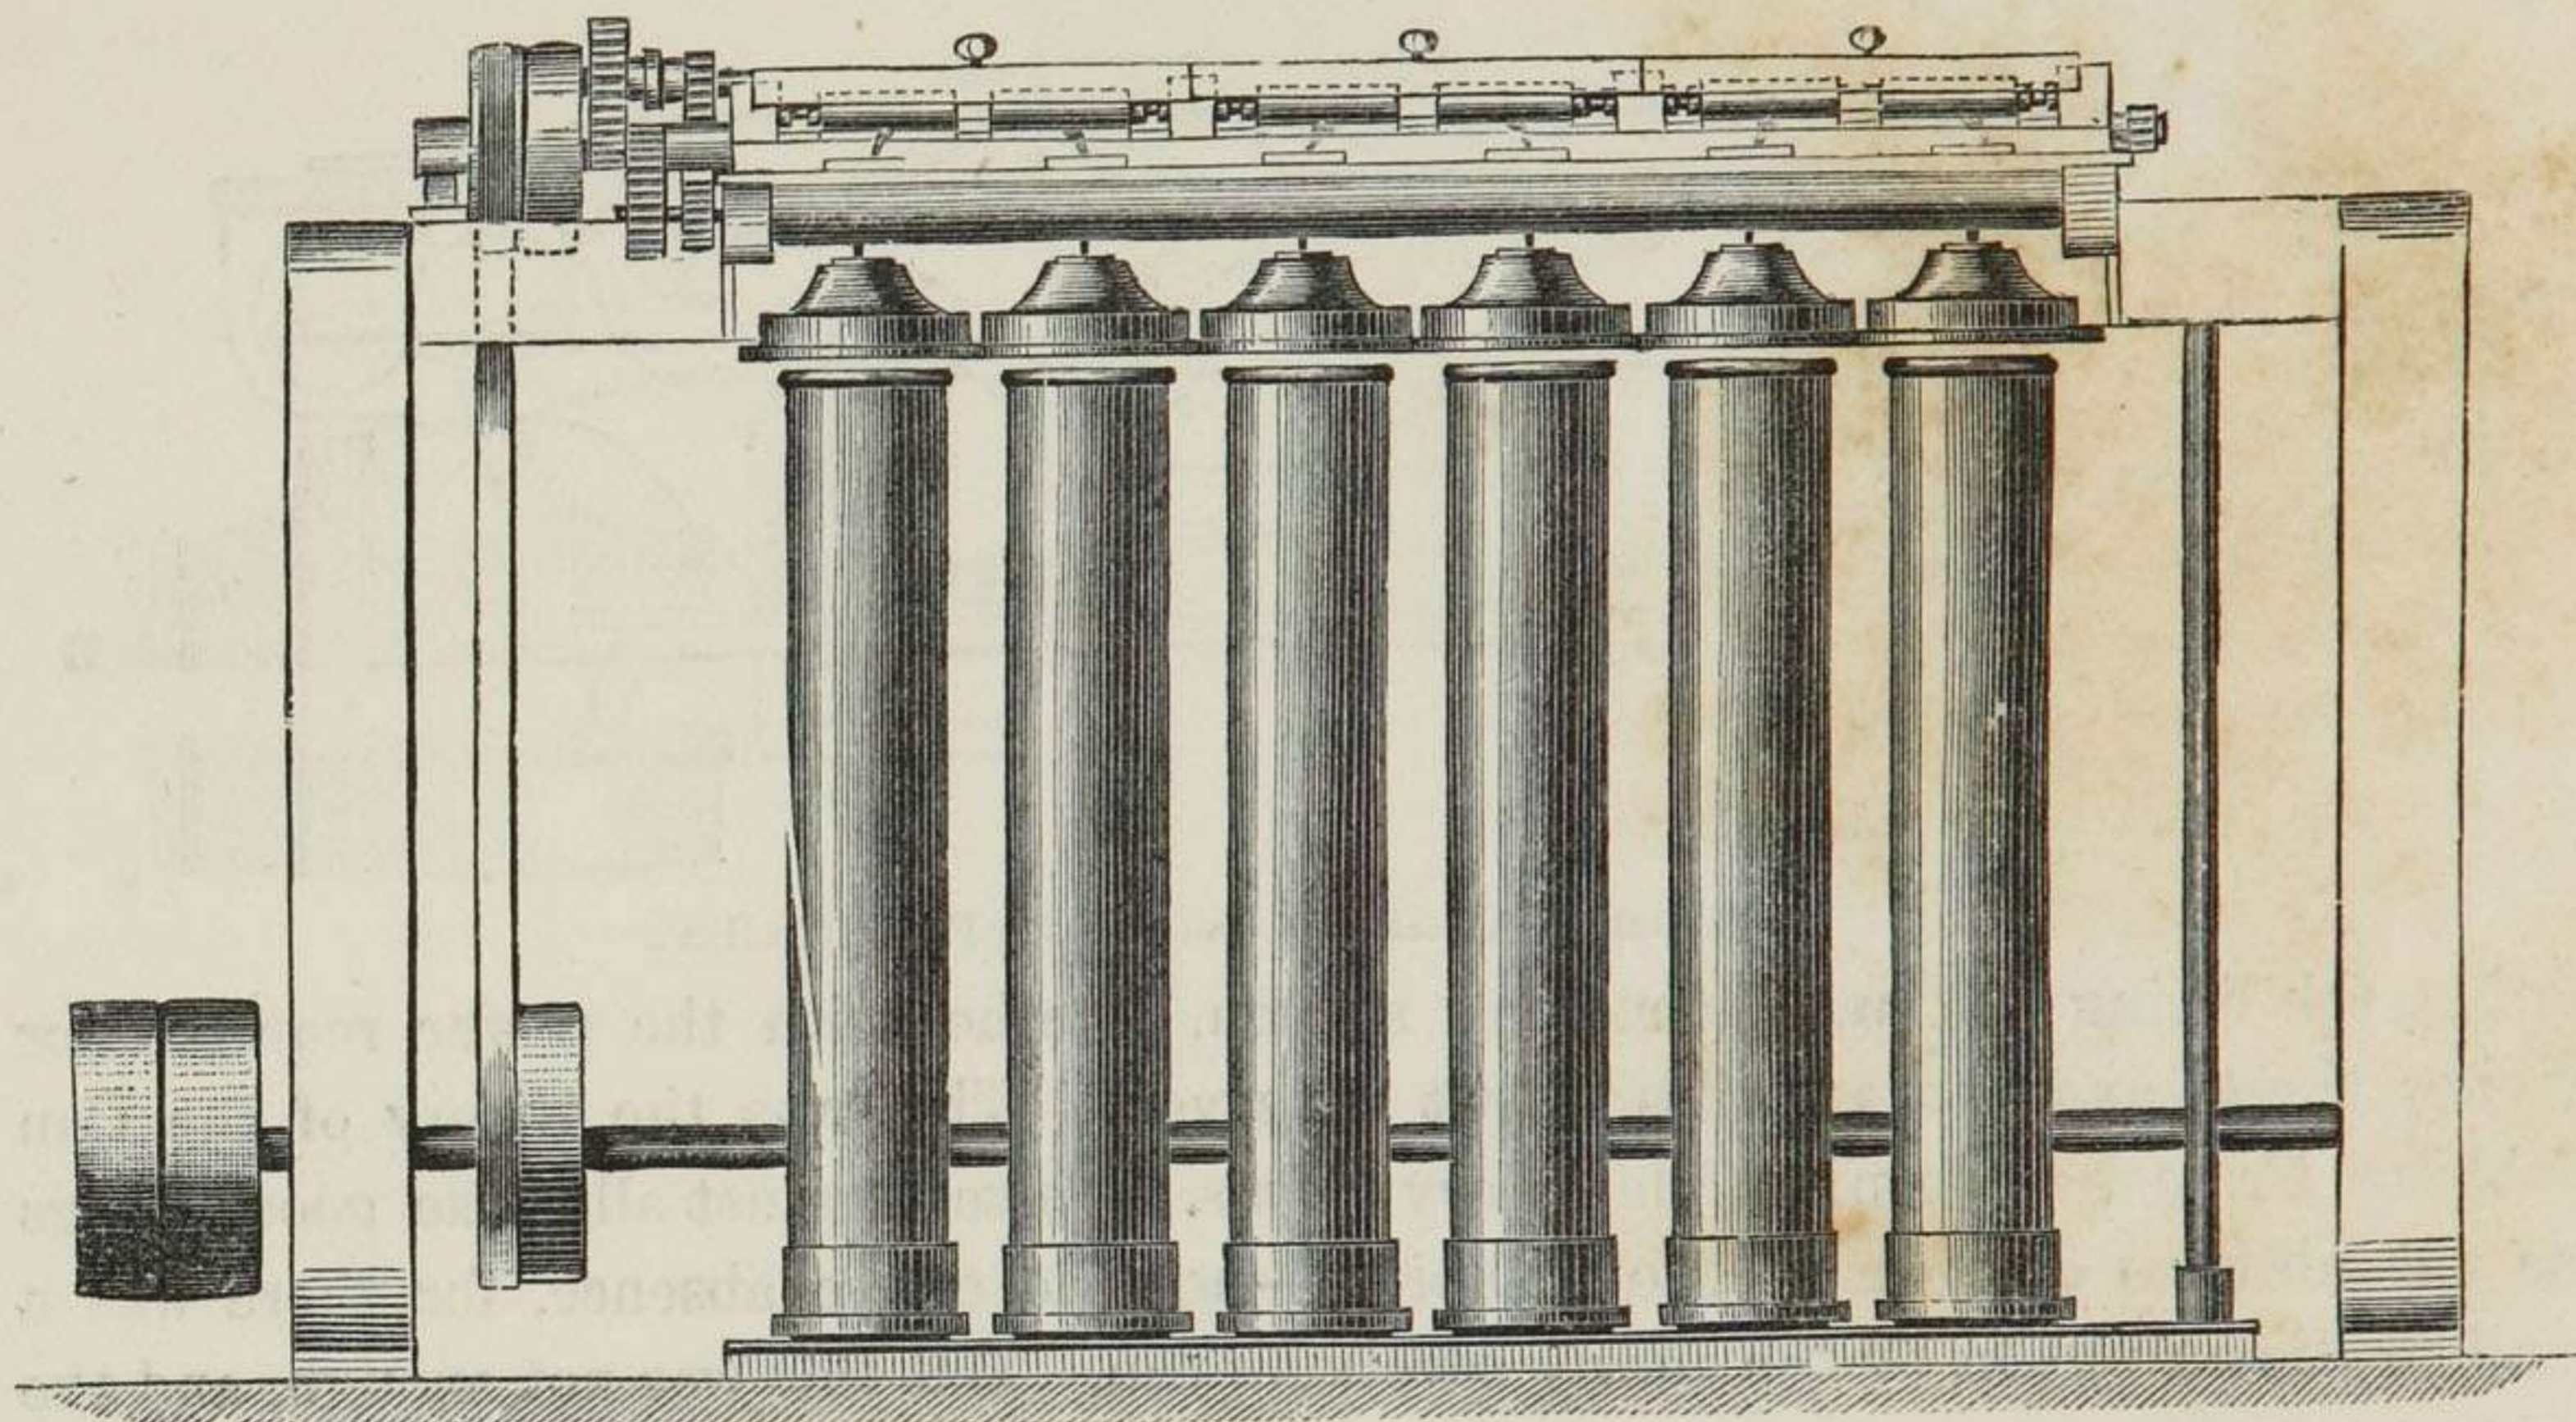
Tatham and Cheetham's Can Slubbing Frame (Front Elevation).
